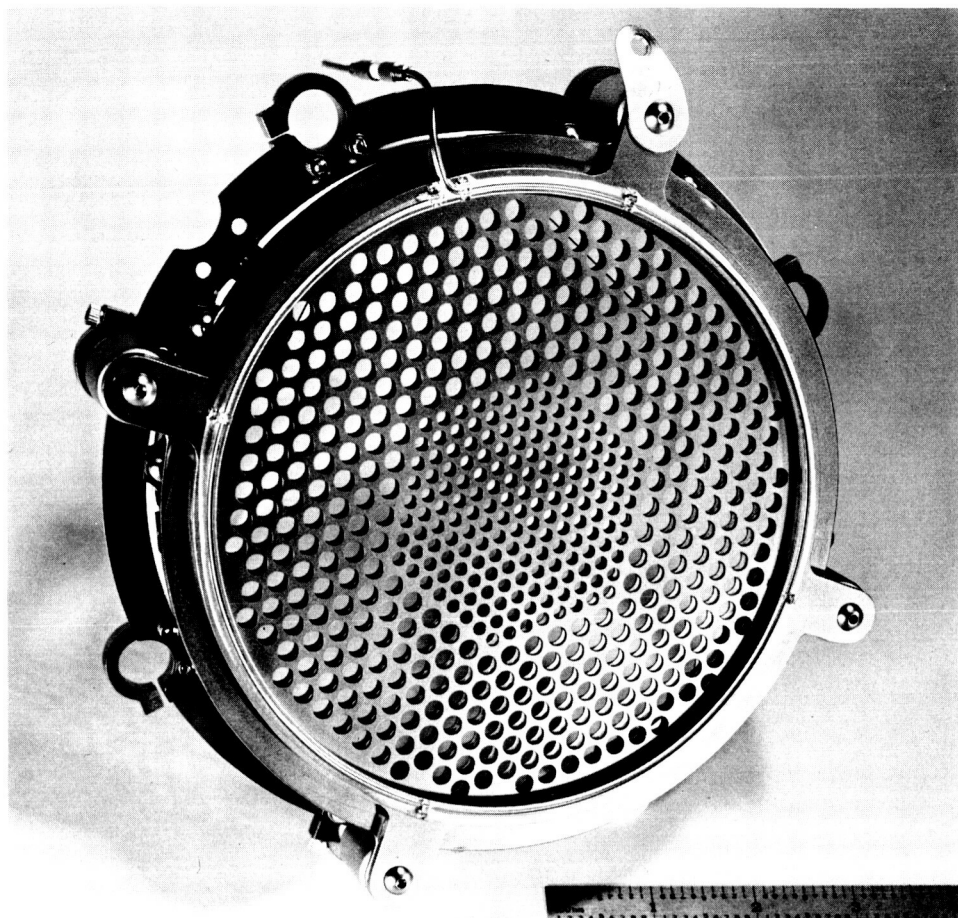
HEATER RING CLAMPED ON ELECTRODE ASSEMBLY
